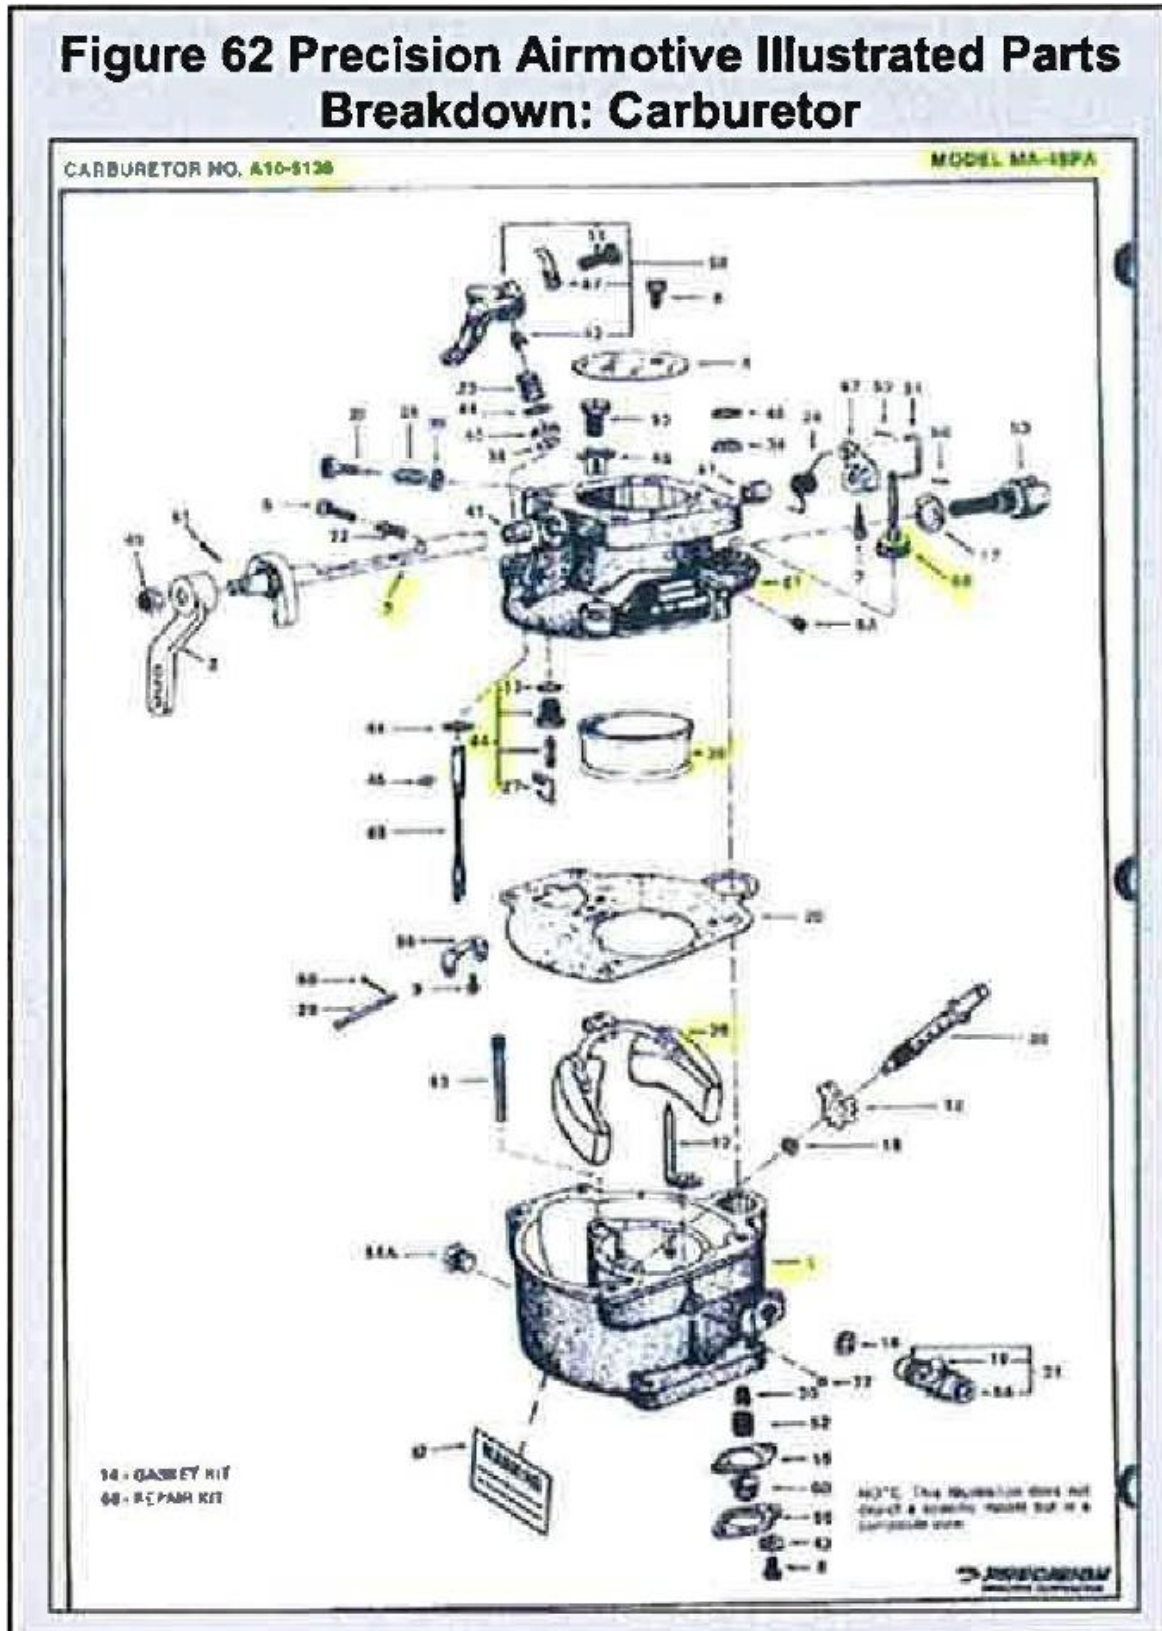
MA-4SPA Carburetor Throttle Body Screws Schematic
